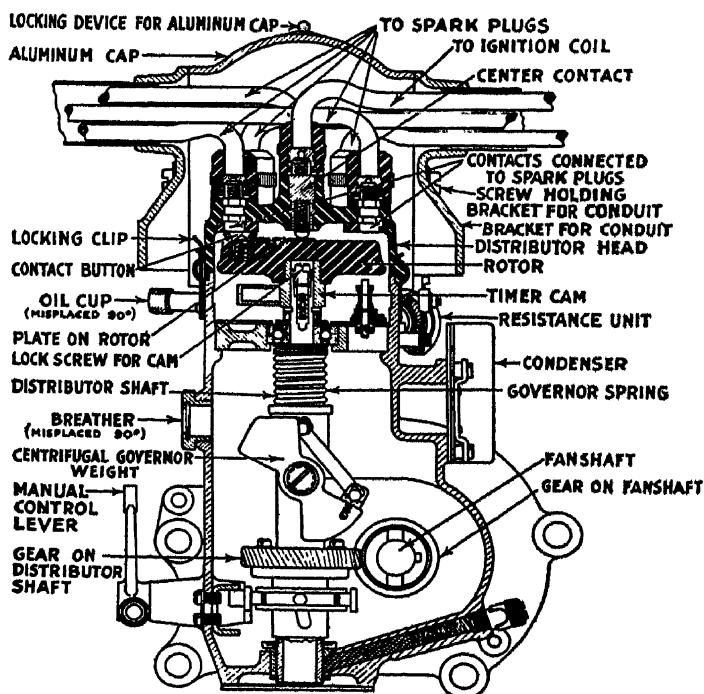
Sectional view of Cadillac Eight ignition unit.
